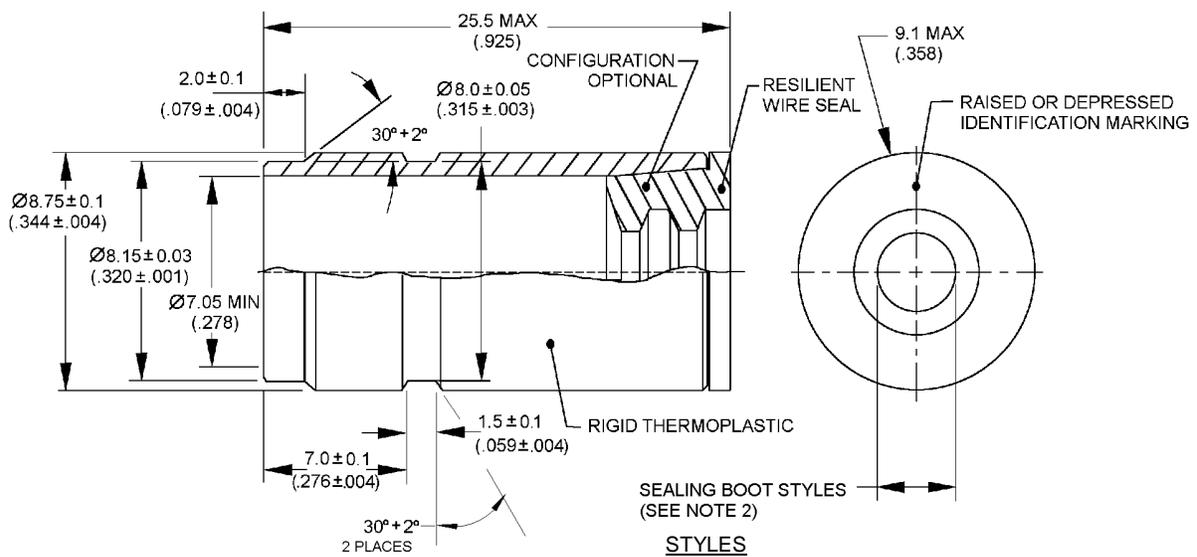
Sealing boot, size 8, shielded crimp contacts.
